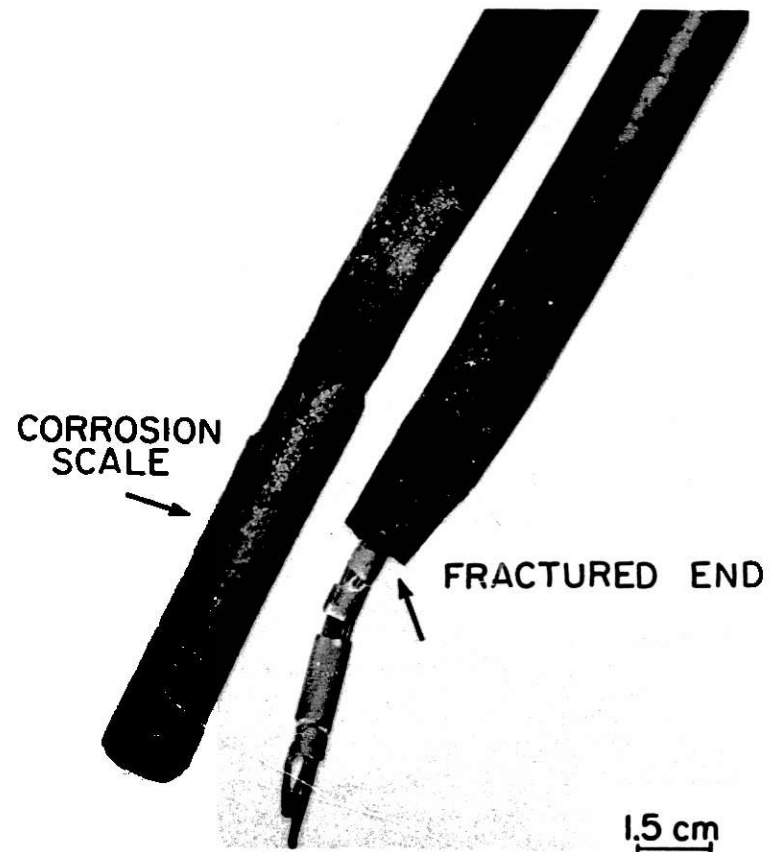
Battelle Char-Burner Thermocouple Protection Tubes Showing Corrosion Scale and Fracture. ANL Neg. No. 306-77-404.
